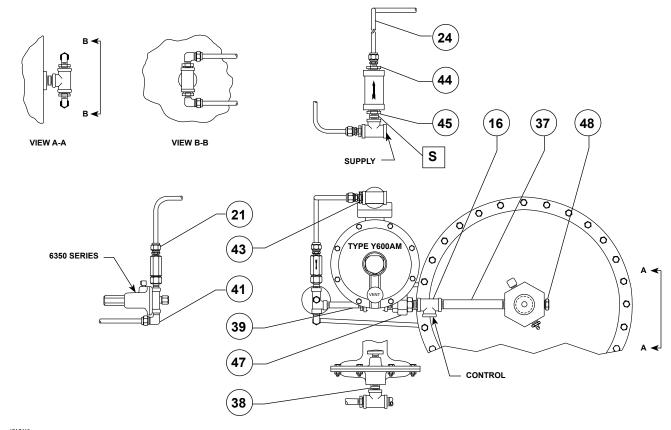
Type 1098-EGR with Type Y600AM Mounting Parts
